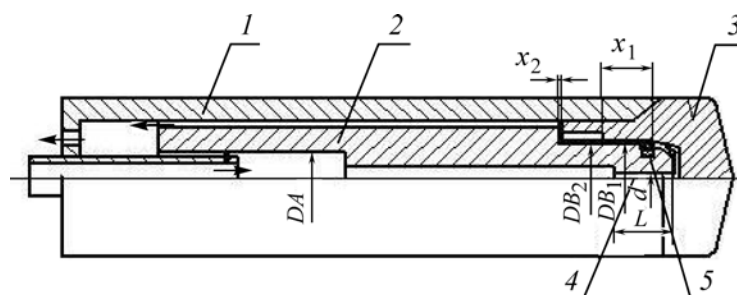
Design scheme of a hydraulic impact machine with elastic valve: 1—body; 2—striking element; 3—anvil; 4—interchamber throttle; 5—ring elastic valve.
